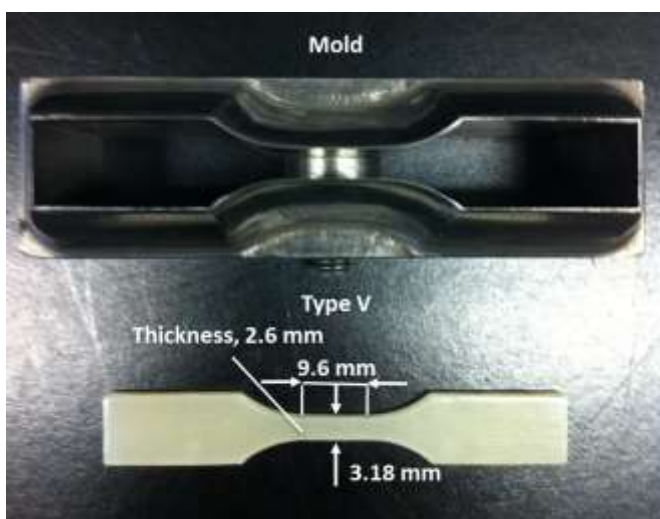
Compression molding samples and mold (type V from ASTM D638)
